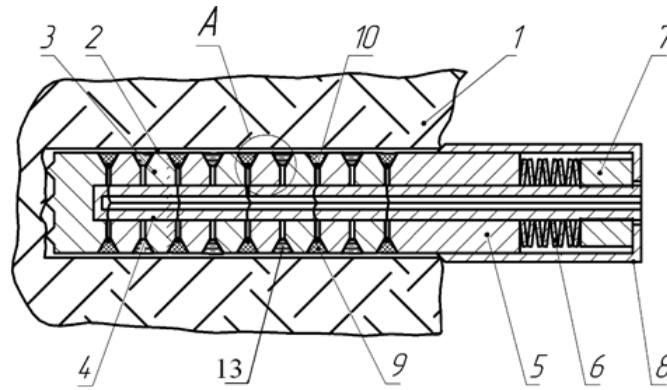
Longitudinal section of a part of the device for drilling and blasting expansion of wells in the initial position
